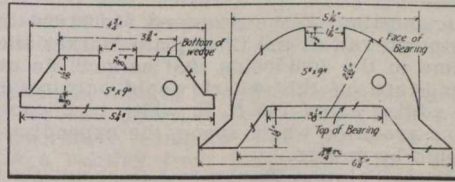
C.N.R. Journal Bearing and Wedge Gauges.
